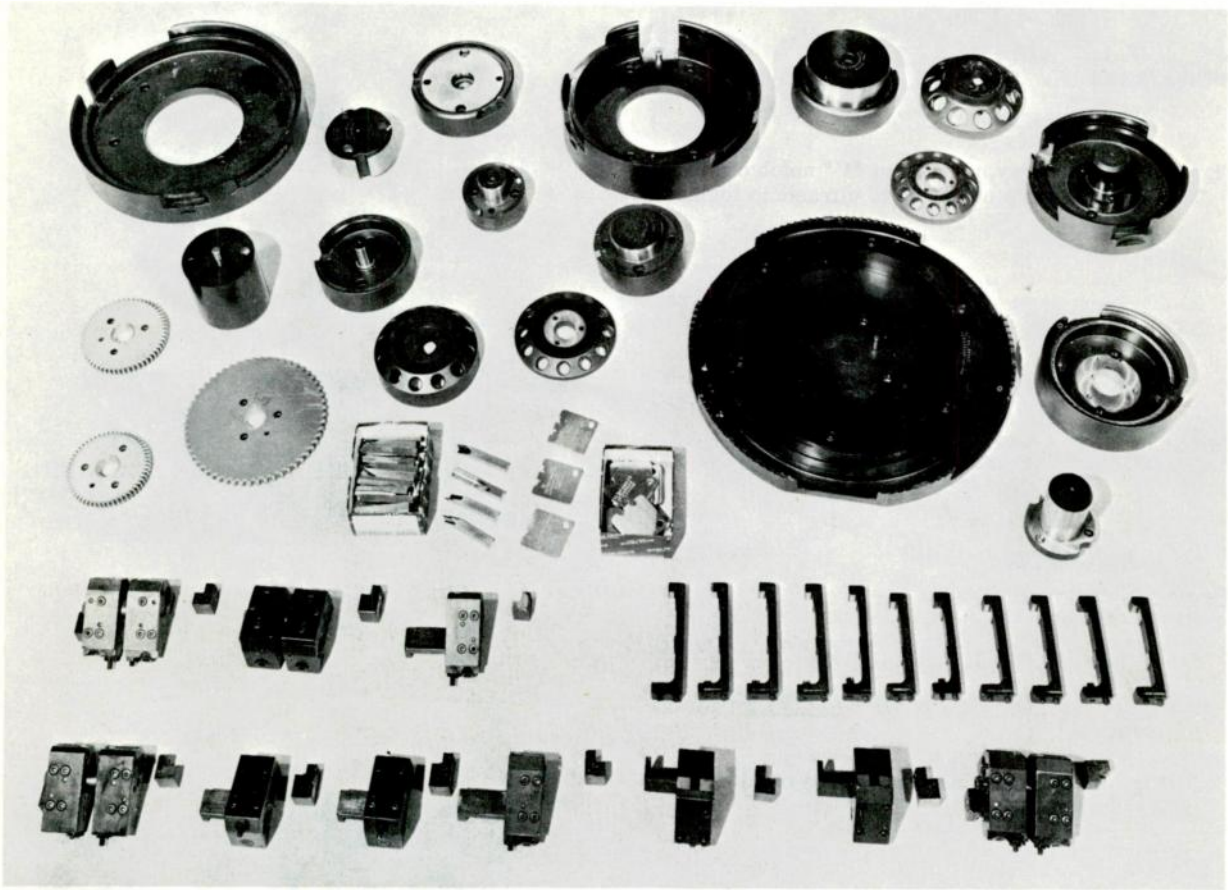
Typical small gear and compressor parts for ultrasonic deburring.
